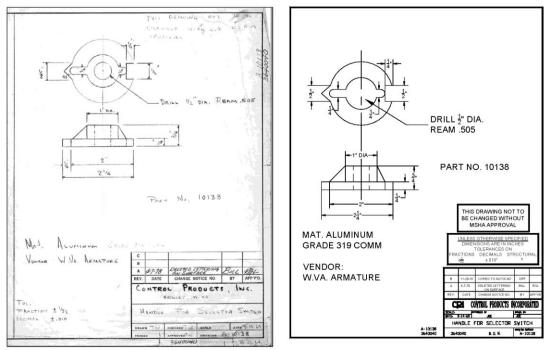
XP Enclosure Application OEM Switch Operator Drawings
